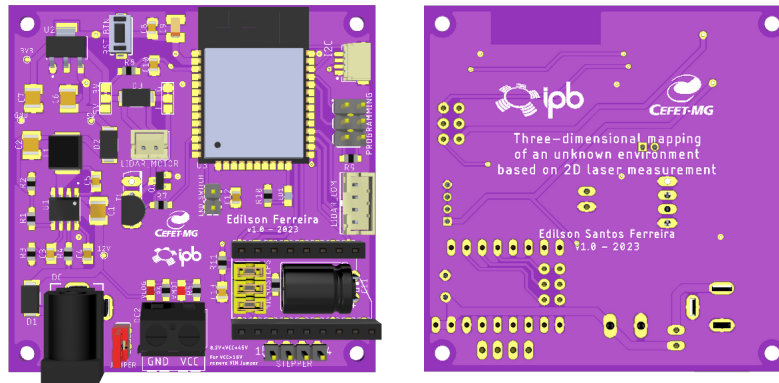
Top and bottom of the 3D visualization of the developed PCB.
